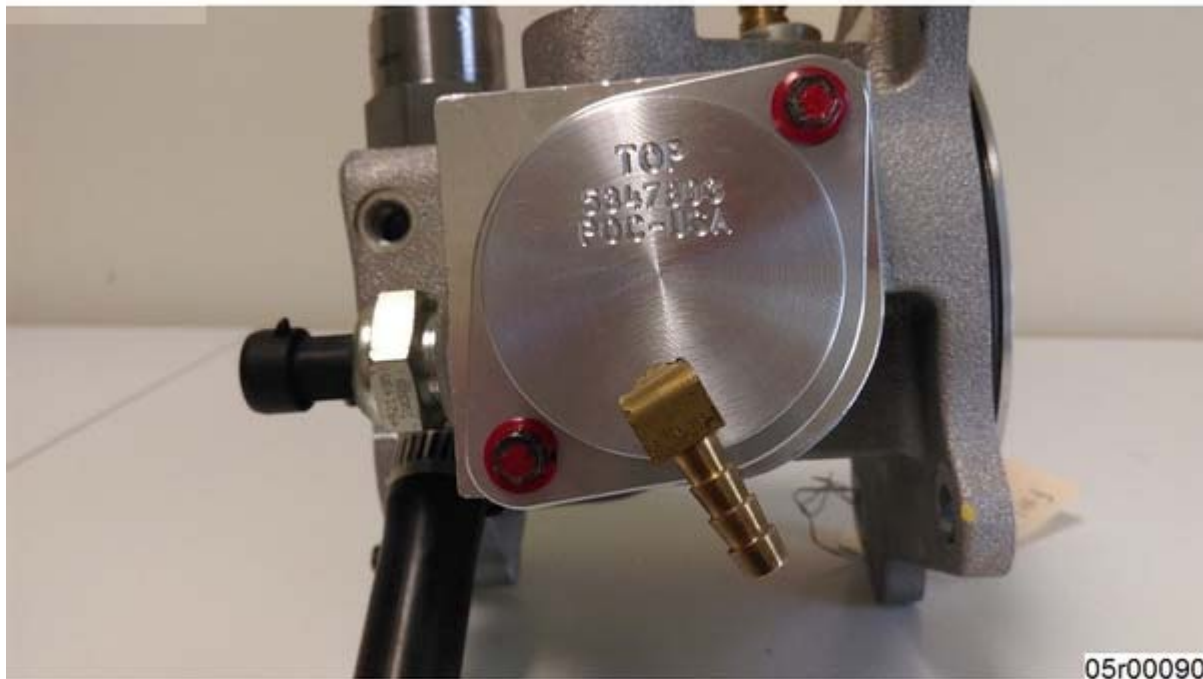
, New Low Pressure Regulator Fuel Control Cover Installed on ISX12 G CM2180 EJ Low Pressure Housing
